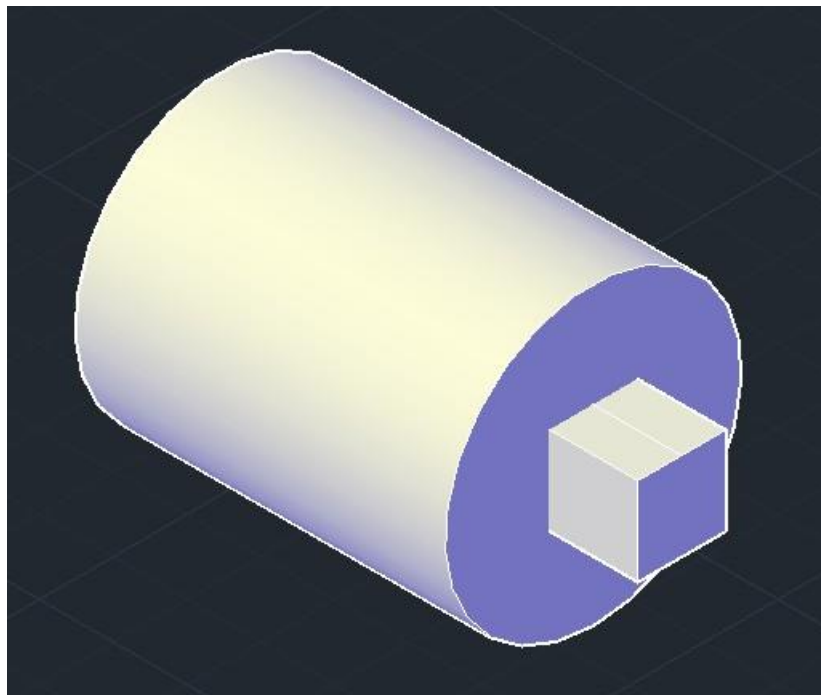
South West Isometric View of the Sleeve designed for the Shaft of Motor and Brushes
